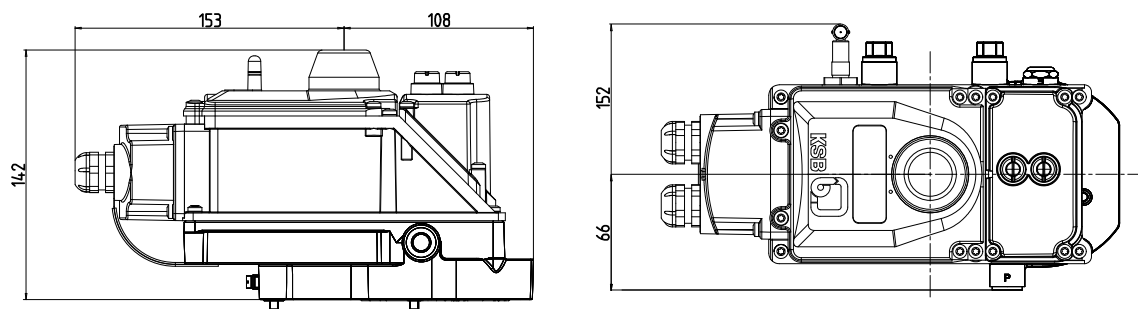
SMARTRONIC U PC / type A1312 dimensions
